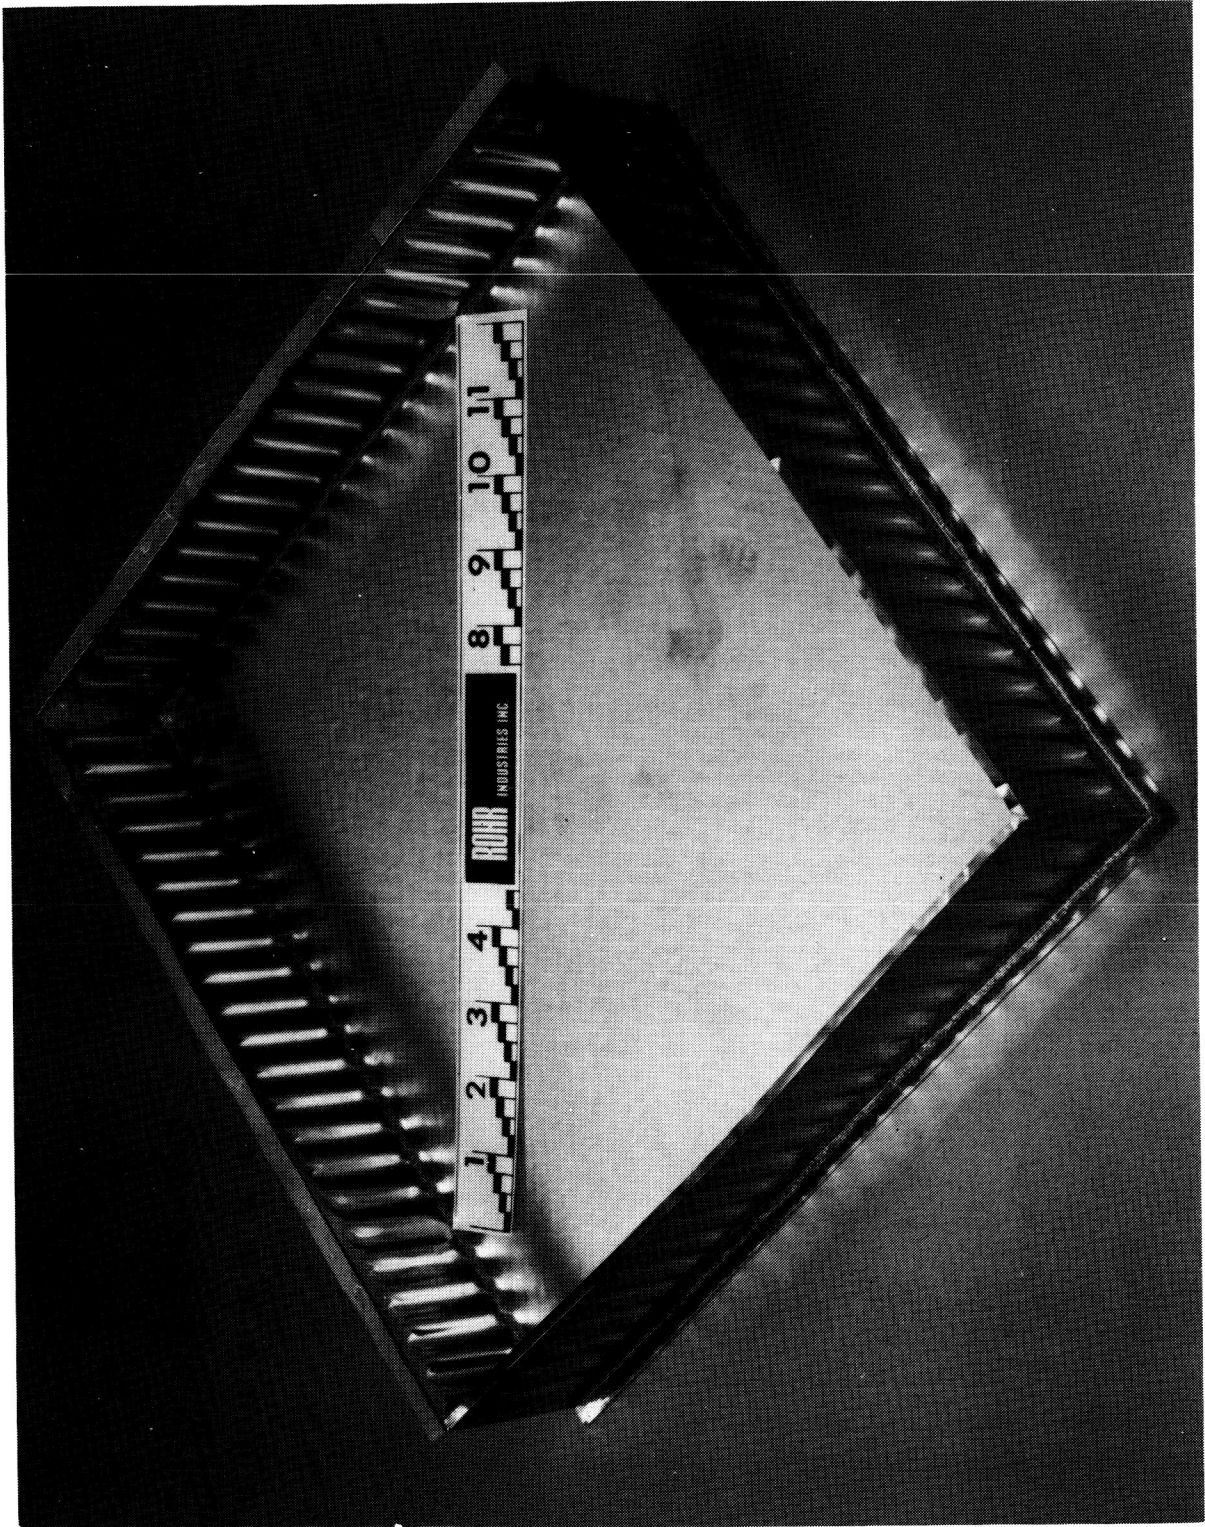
INCONEL 617 Subassembly after Brazing/Diffusion Bonding
